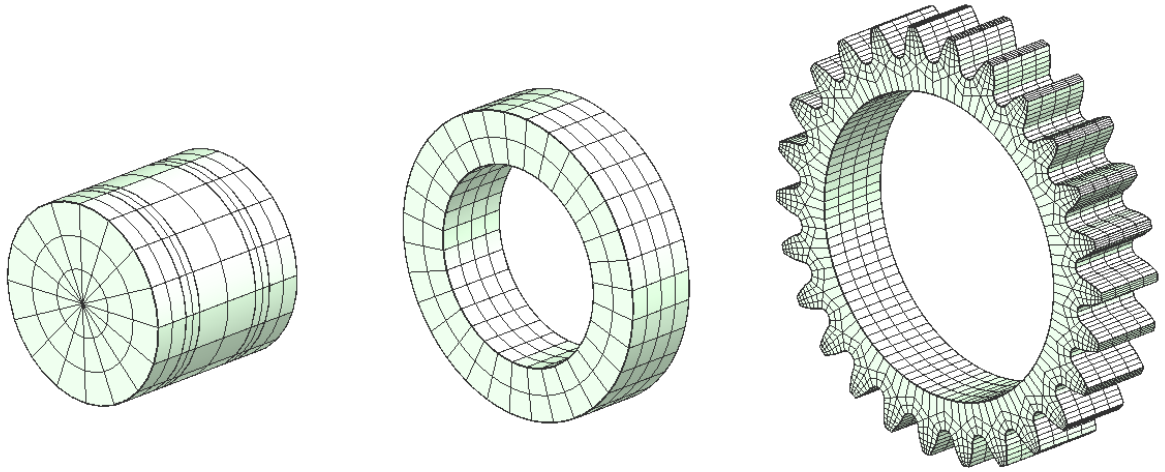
Picture showing the meshed parts which define the driven wheel, i.e. the shaft, the rim and the ring structure.
